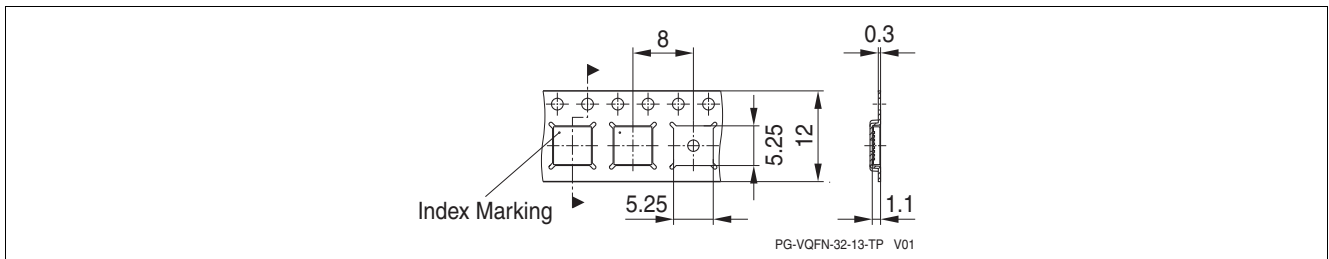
Tape & Reel Dimensions PG-VQFN-32-13
